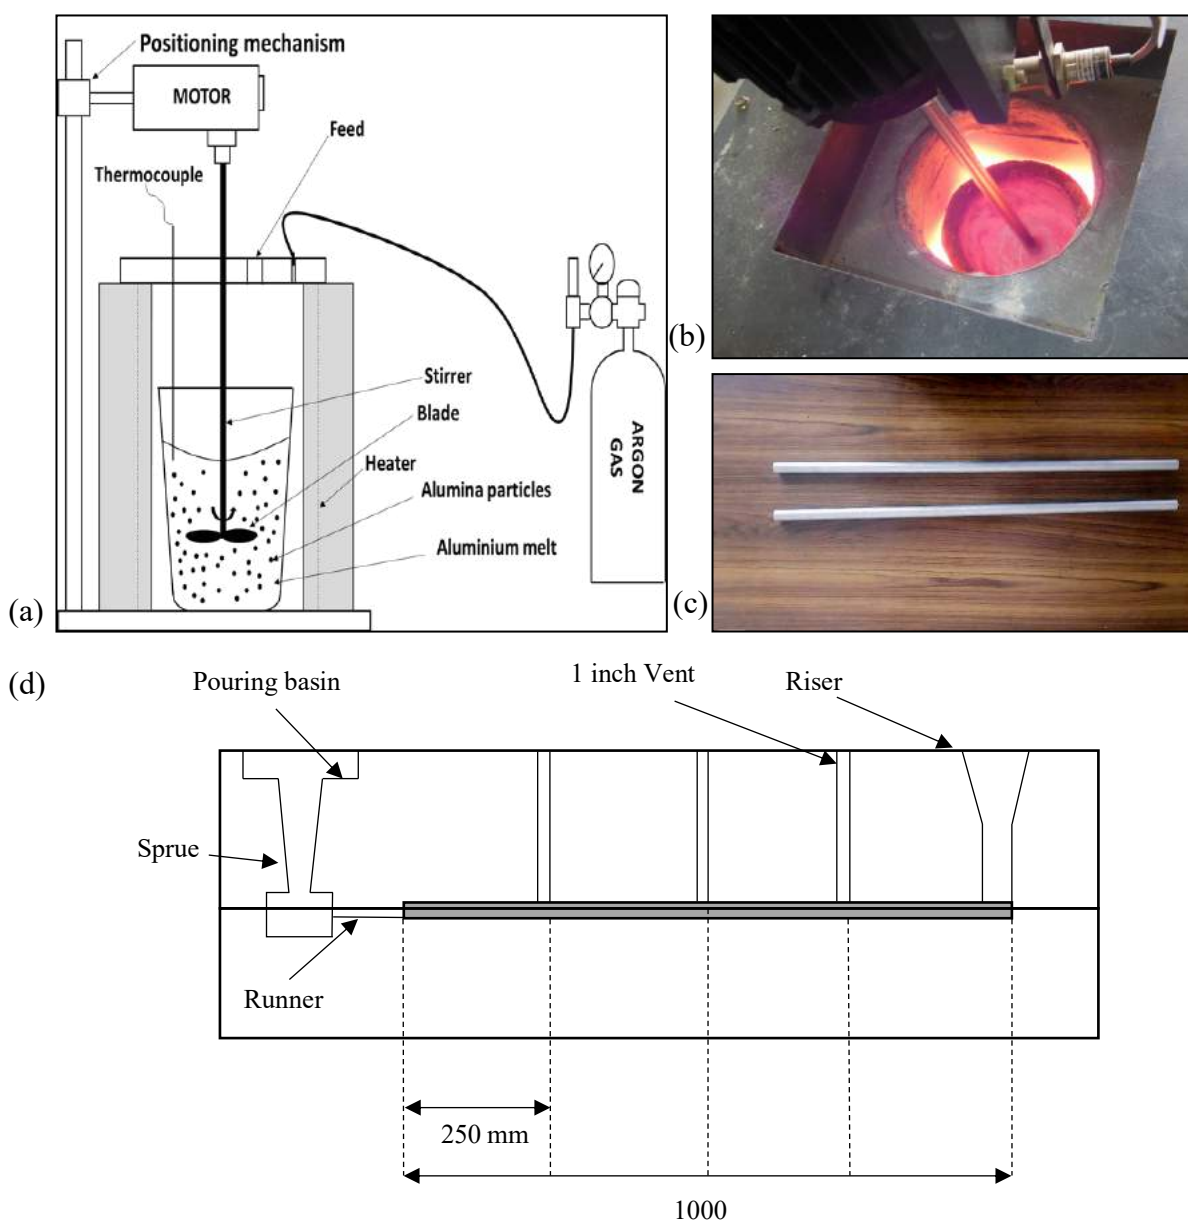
(a) Stir casting set up (b) Vortex Generation (c) Stir casted shaft (d) Sand casting set-up
